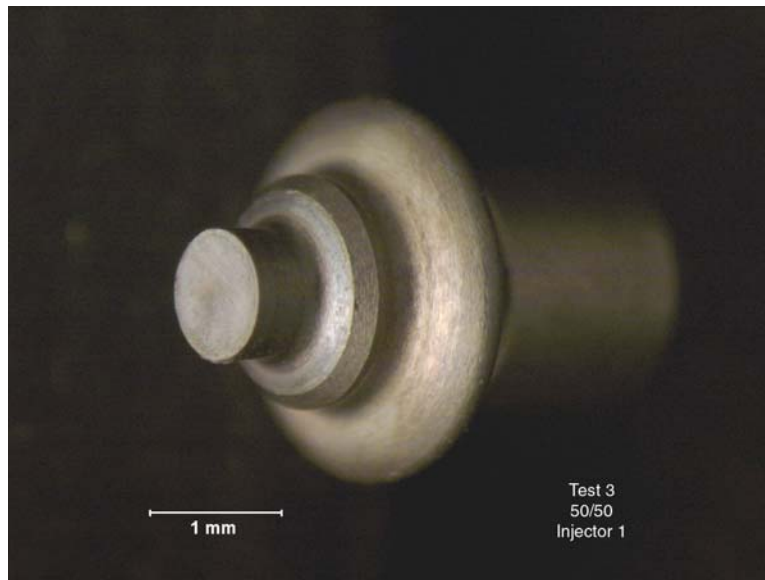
AF7824 50/50 JP8/SPK, Fuel Injector Control Valve
